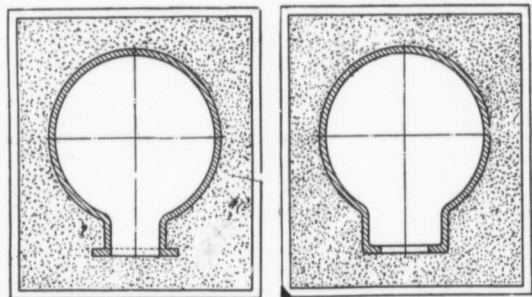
Mold for a Nozzle with Flange. Fig. 4—Suggested Design for the Nozzle in Fig. 3.
